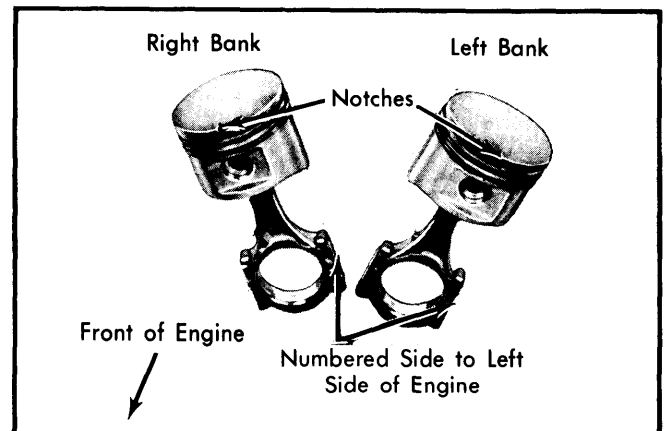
Pistons and Connecting Rods Correctly Assembled
